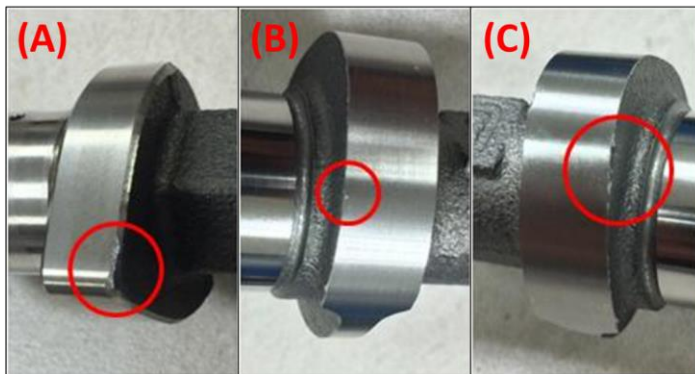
(A) Grinding Damage, (B) Pitting and (C) Shipping Damage
